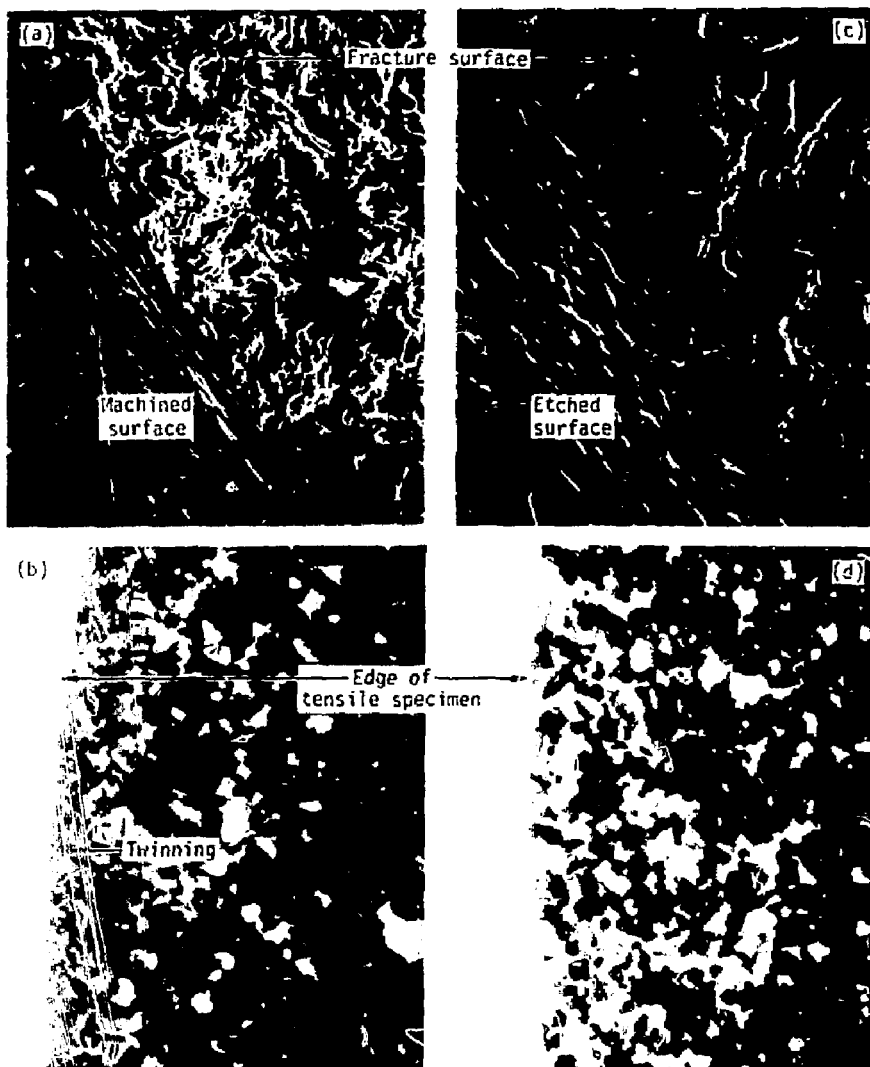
Beryllium tensile bars showing effect of machining damage followed by chemical removal of 0.08 mm (0.003 in.) of material from the surface. (a) "As machined" specimen showing fracture surface and excessive working from machining of surface on outer diameter of gage length (220X). (b) Polished cross section of "as machined" specimen showing extensive twinning at surface (200X). (c) Etched specimen showing fracture surface and etched surface on outer diameter of gage length (220X). (d) Polished cross section of etched specimen showing absence of twins at surface (200X).
